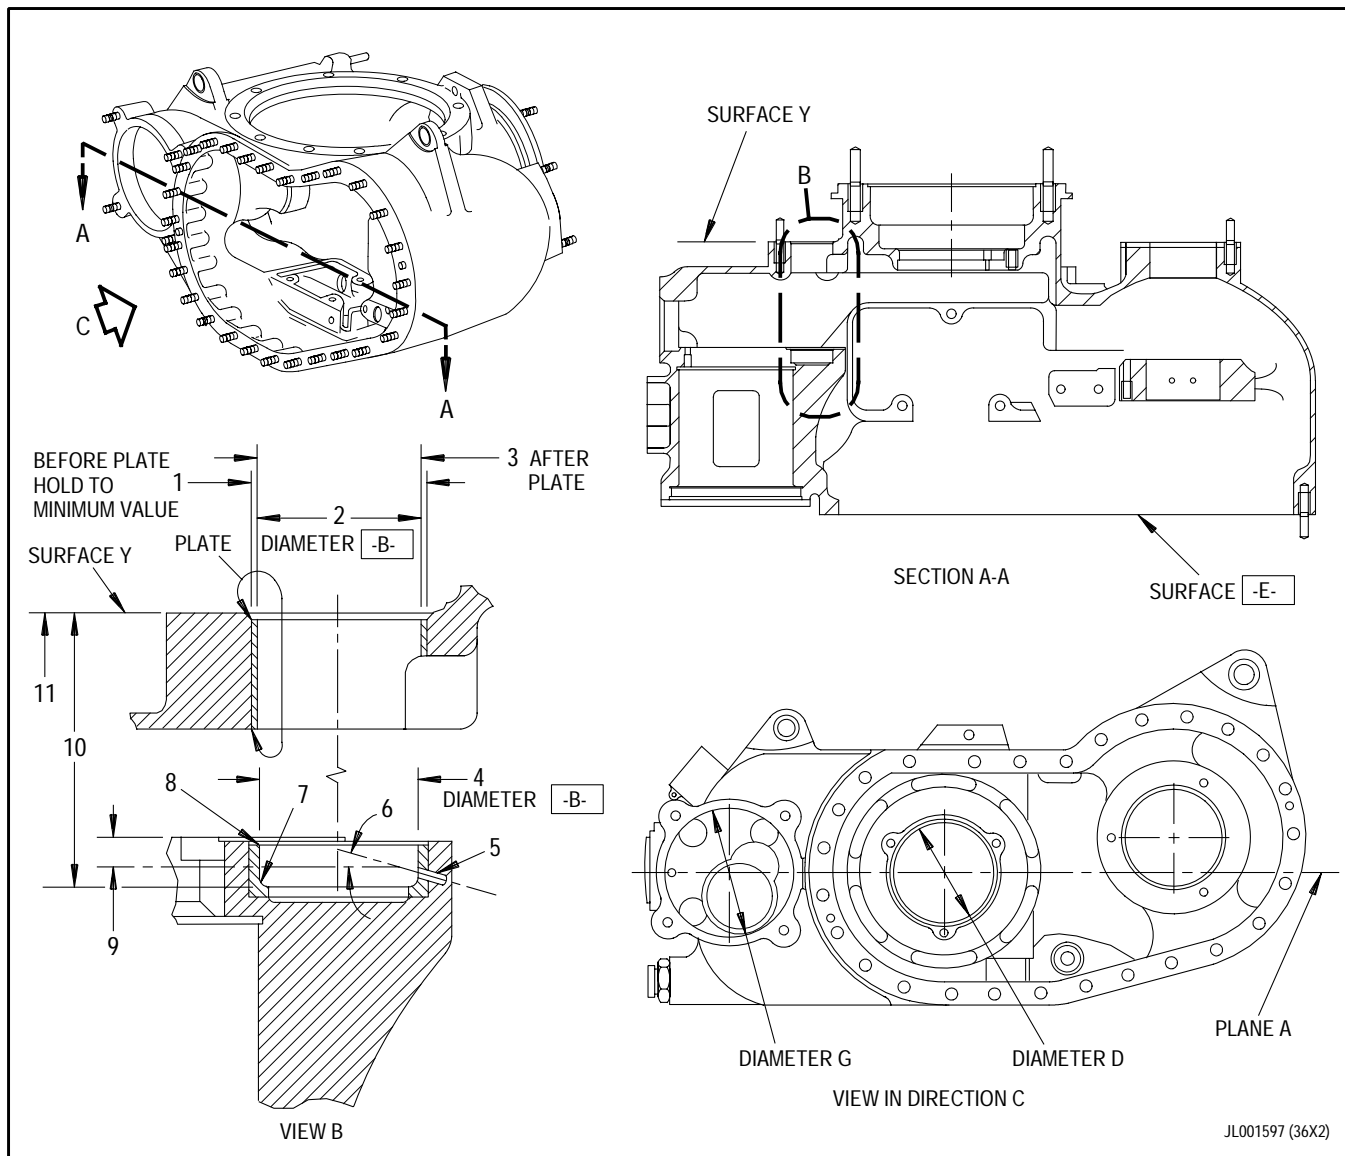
Gearbox (Rear) Housing Assembly - Bushing Replacement
